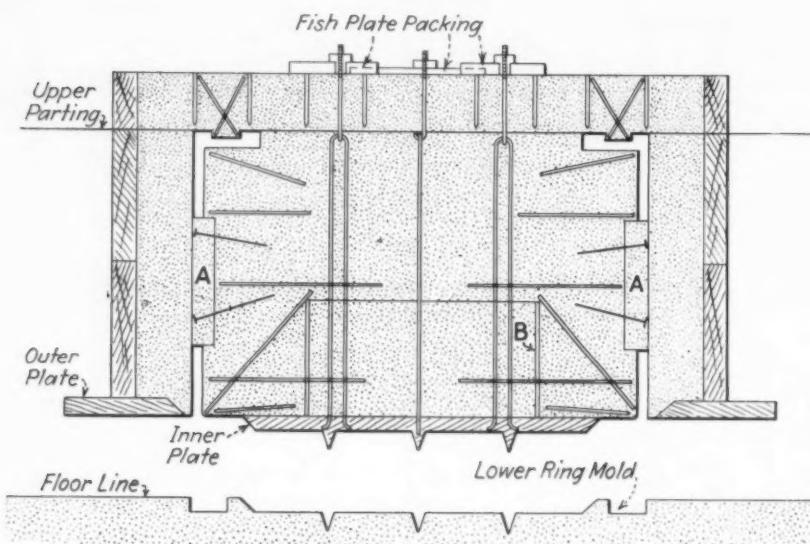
Completed mold in suspension before closing. "A, A," hand-hole cores. "B," ring "leanto" supporting gaggers.
